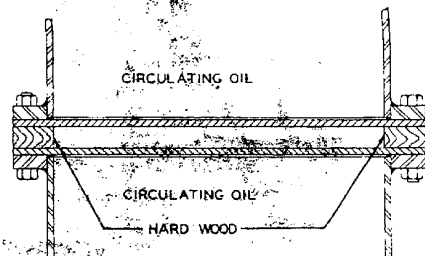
CROSS-SECTIONAL VIEW OF WORKING SECTION
